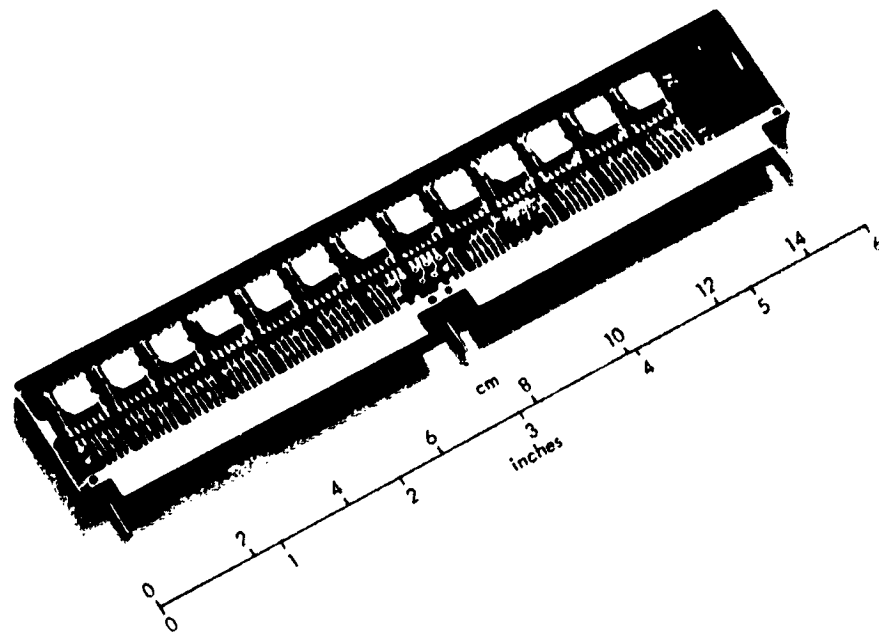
Experimental Module With ICs Reflow Soldered to Multilayer Printed Wiring Board
